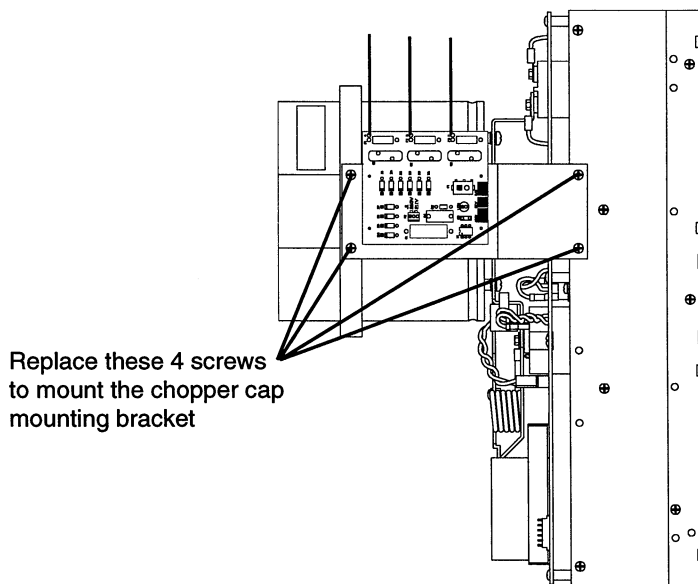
Mounting Chopper Cap Mounting Bracket on to Chopper #4
